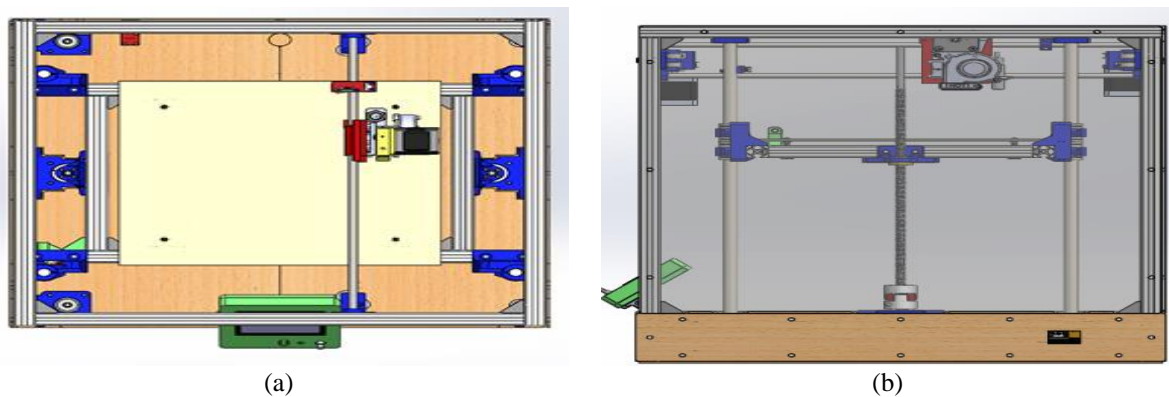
(a, b): SolidWorks Proposed 3D printer design.
